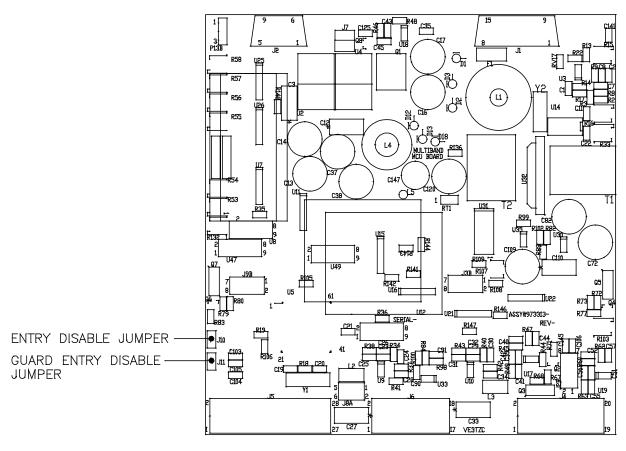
Microprocessor Control Unit (MCU) PCB Module: Internal Enable/Disable Jumper Locations
